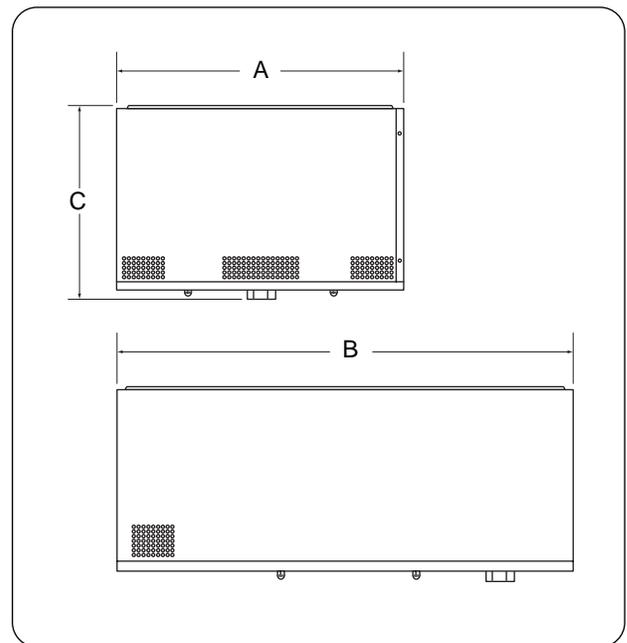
Dimensions – HWB-FUL Insulated – Bottom Mount Models
